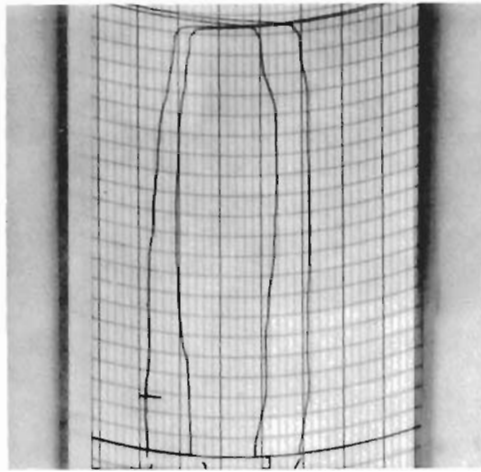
Charted involute pattern. The straight line indicates true involute of the active tooth profile.
